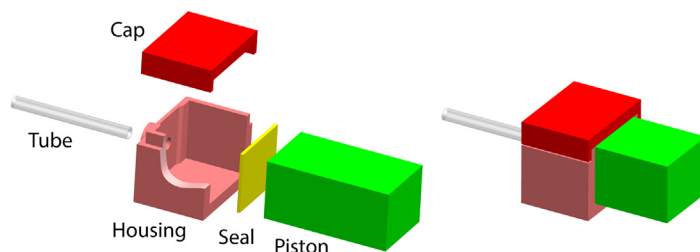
Exploded (left) and assembled (right) views of single-acting cylinder design, with housing (red), piston (green), and seal (yellow).
